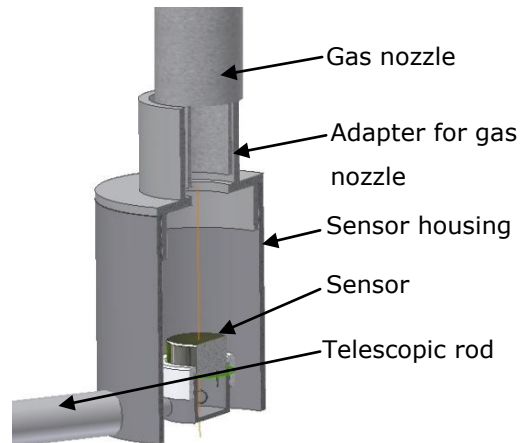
Section view of the sensor housing. The sensor wiring is connected to the readout unit along the telescopic rod.
